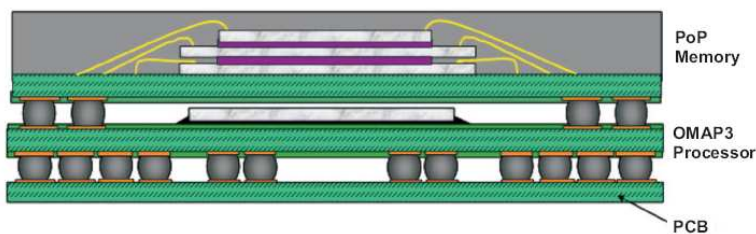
A stacked BGA package containing a processor chip and a stack of memory chips [29].
